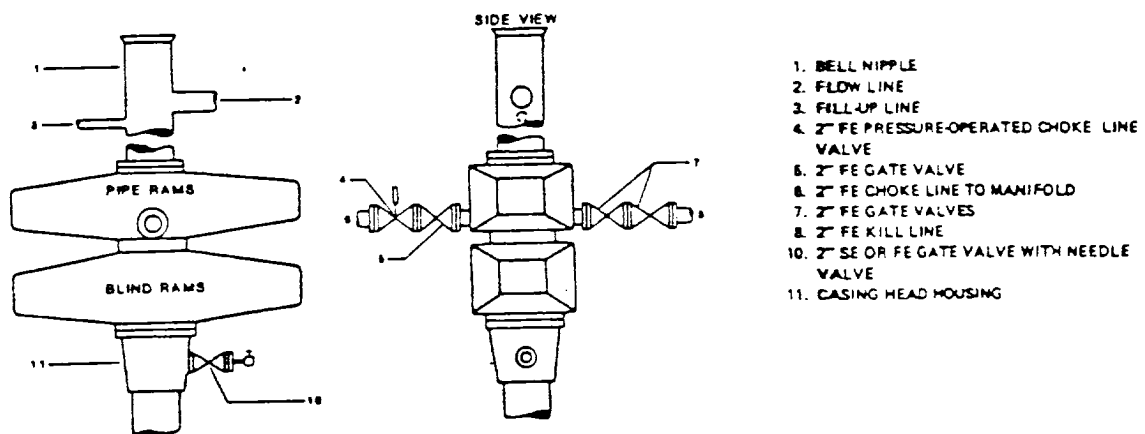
Standard Hydraulic Blowout Preventer Assembly (2 M or 3 M Working Pressure) Alternative 3 (without Drilling Spool)
